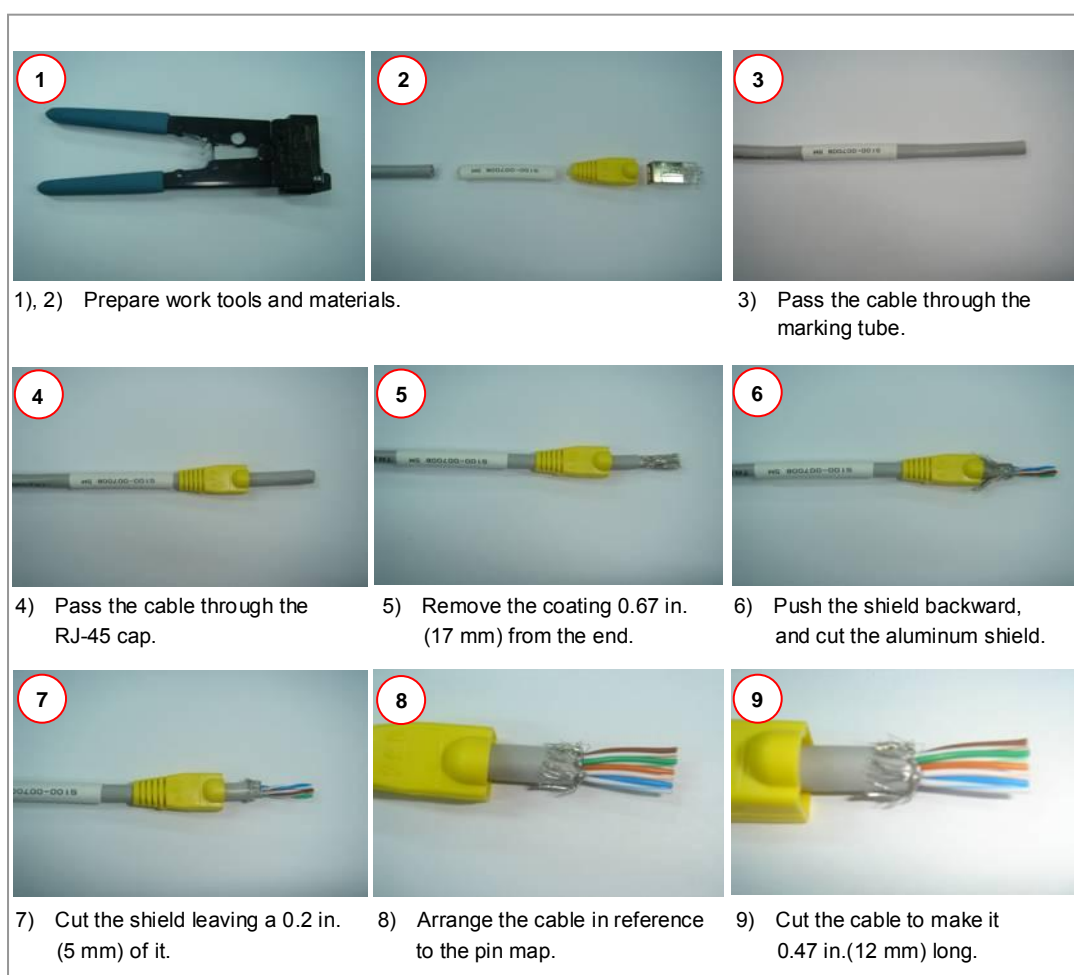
Assembling the RJ-45 Connector (Shield Type) (1)
